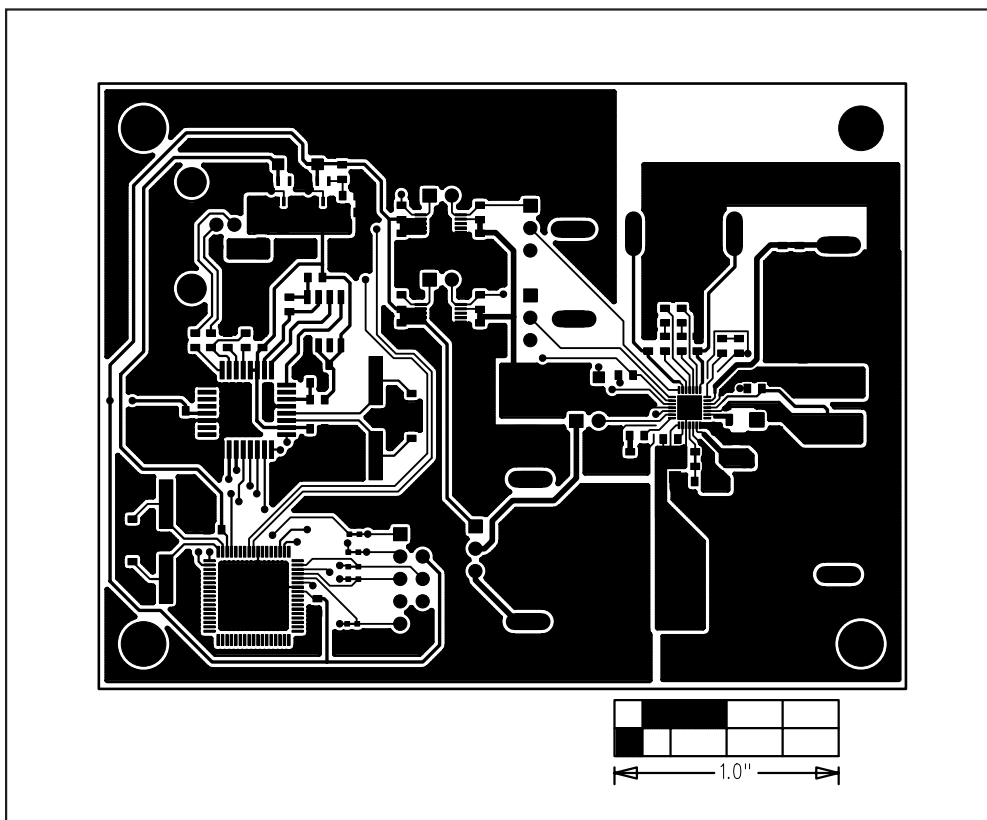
MAX17065 EV Kit PCB Layout—Component Side
